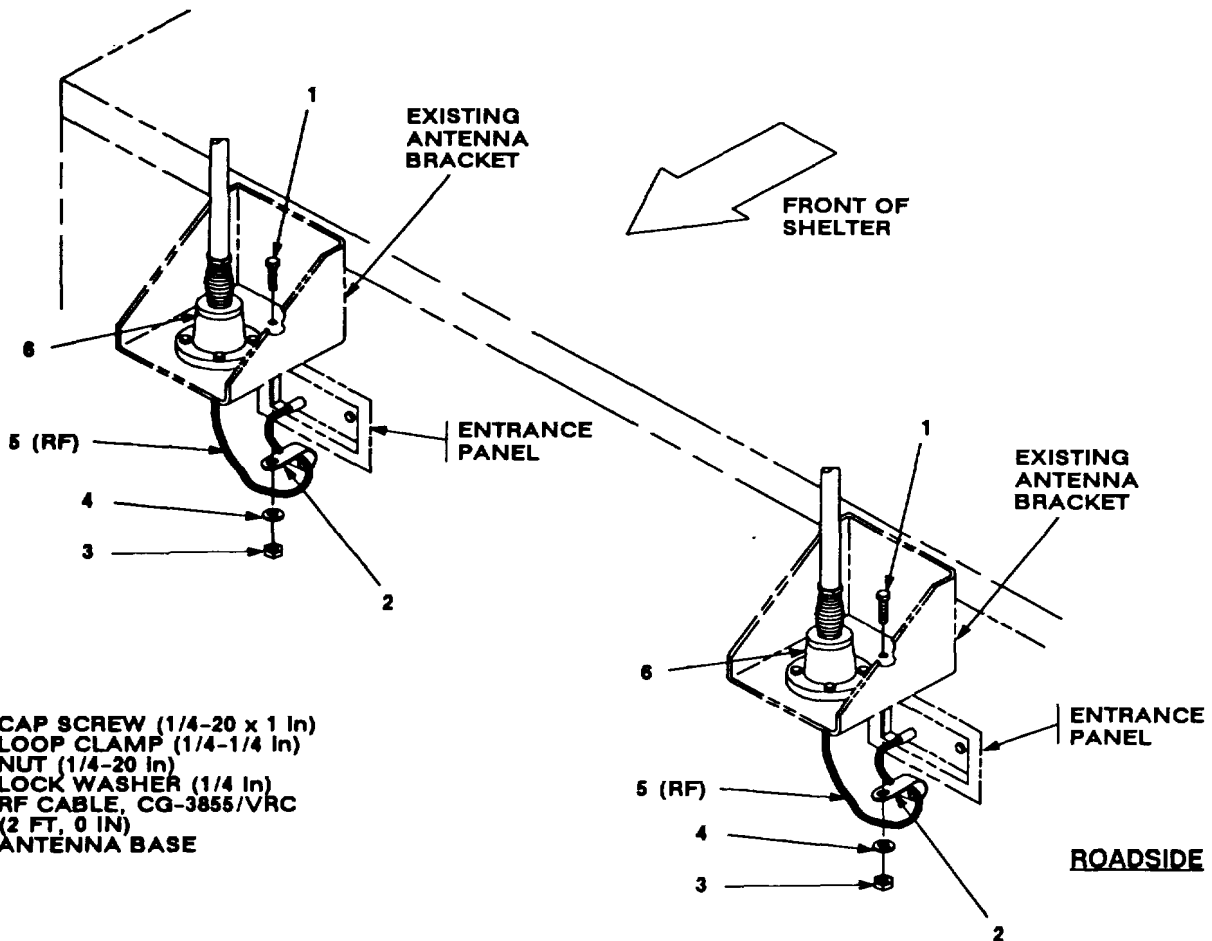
(1). Cable Installation: Exterior RF Cabling
